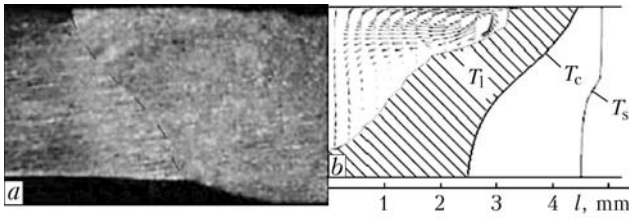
Experimental (a) and calculated (b) section of welds made by TIG welding at $I_w = 180$ A
